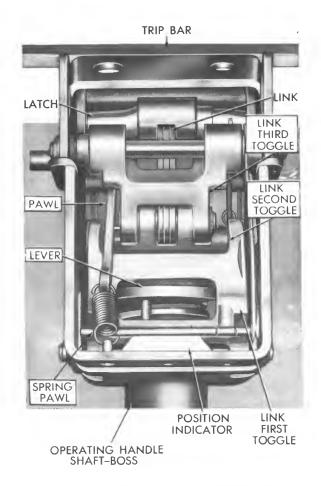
Top View of Breaker Operating Mechanism (Photo TP-55-486)
